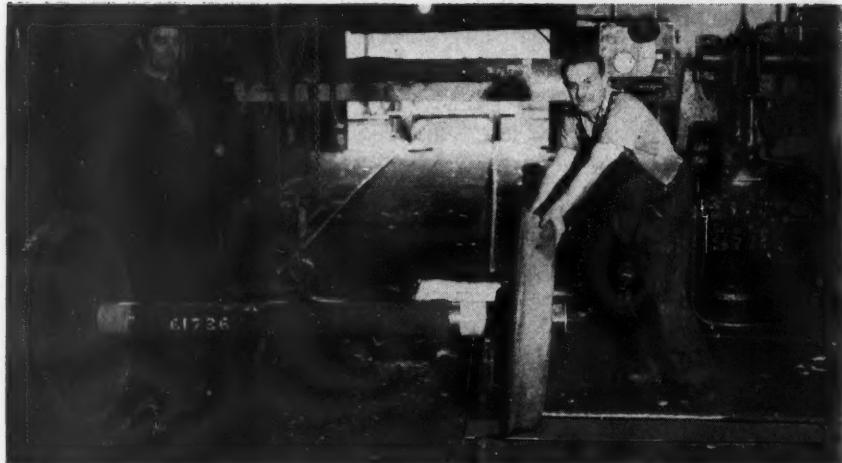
A moving platform, attached to the piston of an air cylinder and controlled by a button in the floor, simplifies the task of assembling car wheels to their axles.
